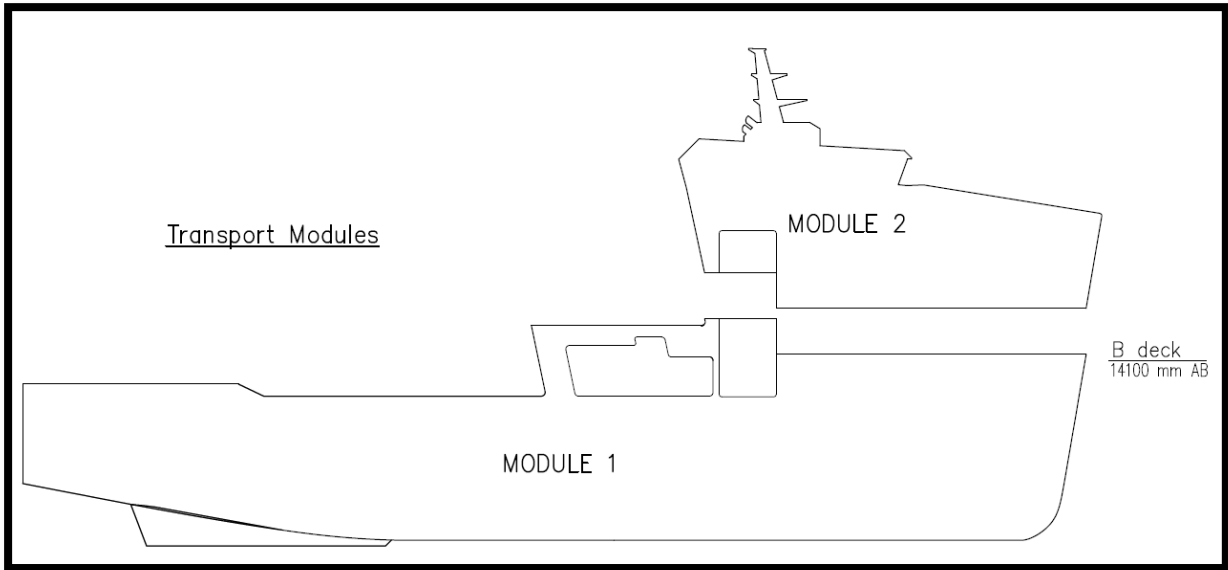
Block Fabrication Plan, module division. DAMEN copyright.
